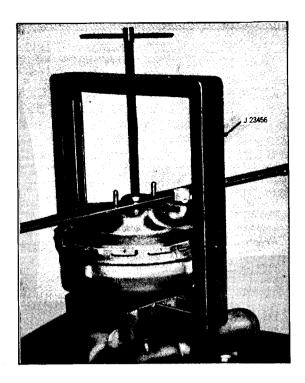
D-7 Tools for Disassembly of Power Brake Housing
